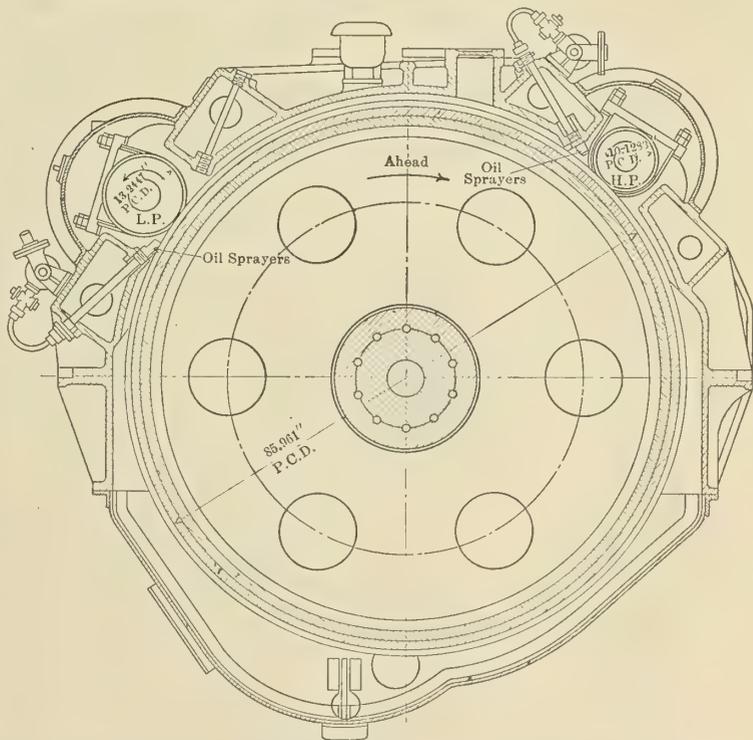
Section Through a Gear Case for a Torpedo Boat Destroyer, Showing Relative Positions of Pinions and Wheel and Lubricating Arrangements for the Teeth
